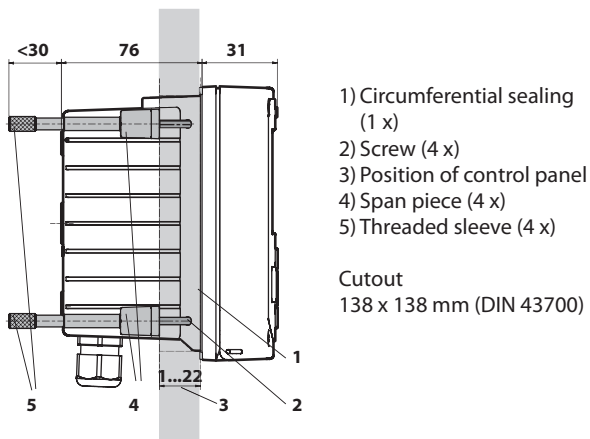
panel-mount kit (All dimensions in mm!)
